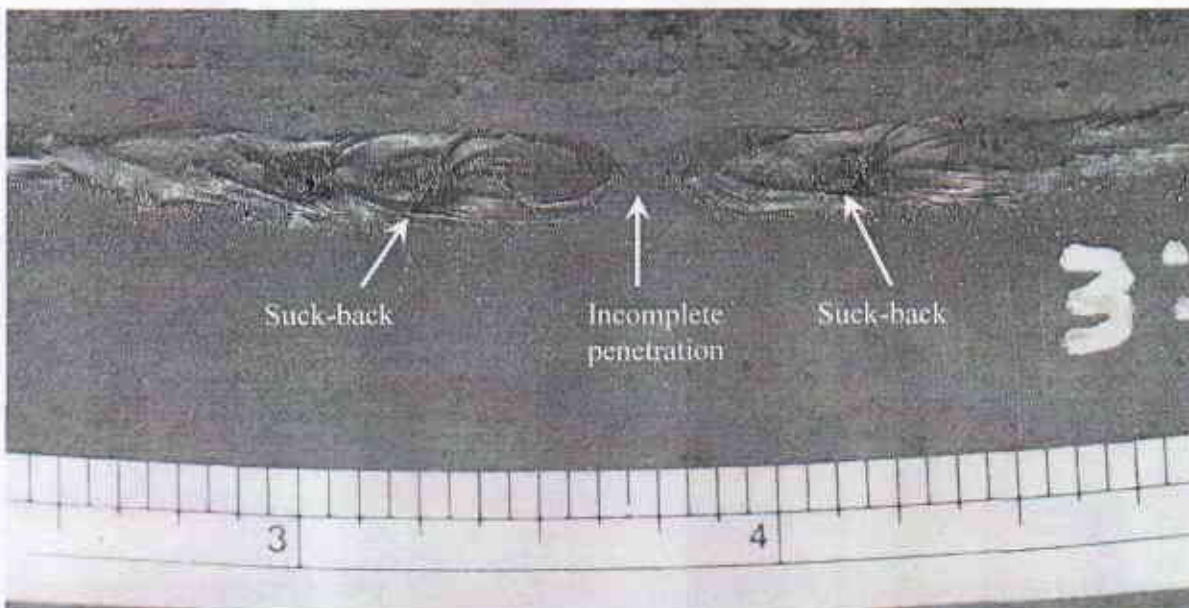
Photograph of root of girth weld in Sample 1. Lack of penetration is clearly visible. Scale divisions are 1/16th inch.
